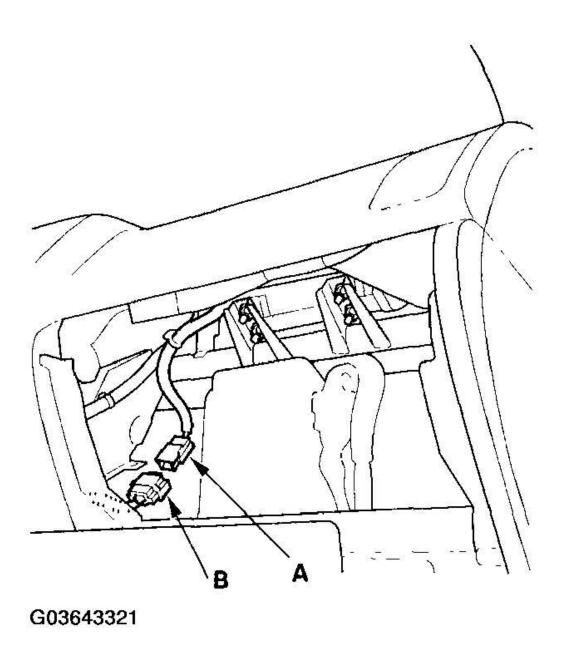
Disconnecting 4P Connector Between Front Passenger's Airbag And SRS Main Harness Courtesy of AMERICAN HONDA MOTOR CO., INC.
